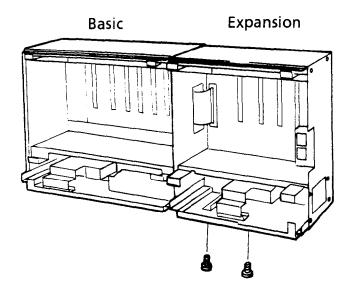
Attaching the Level II Expansion KSU to the Wall Mounting Bracket
